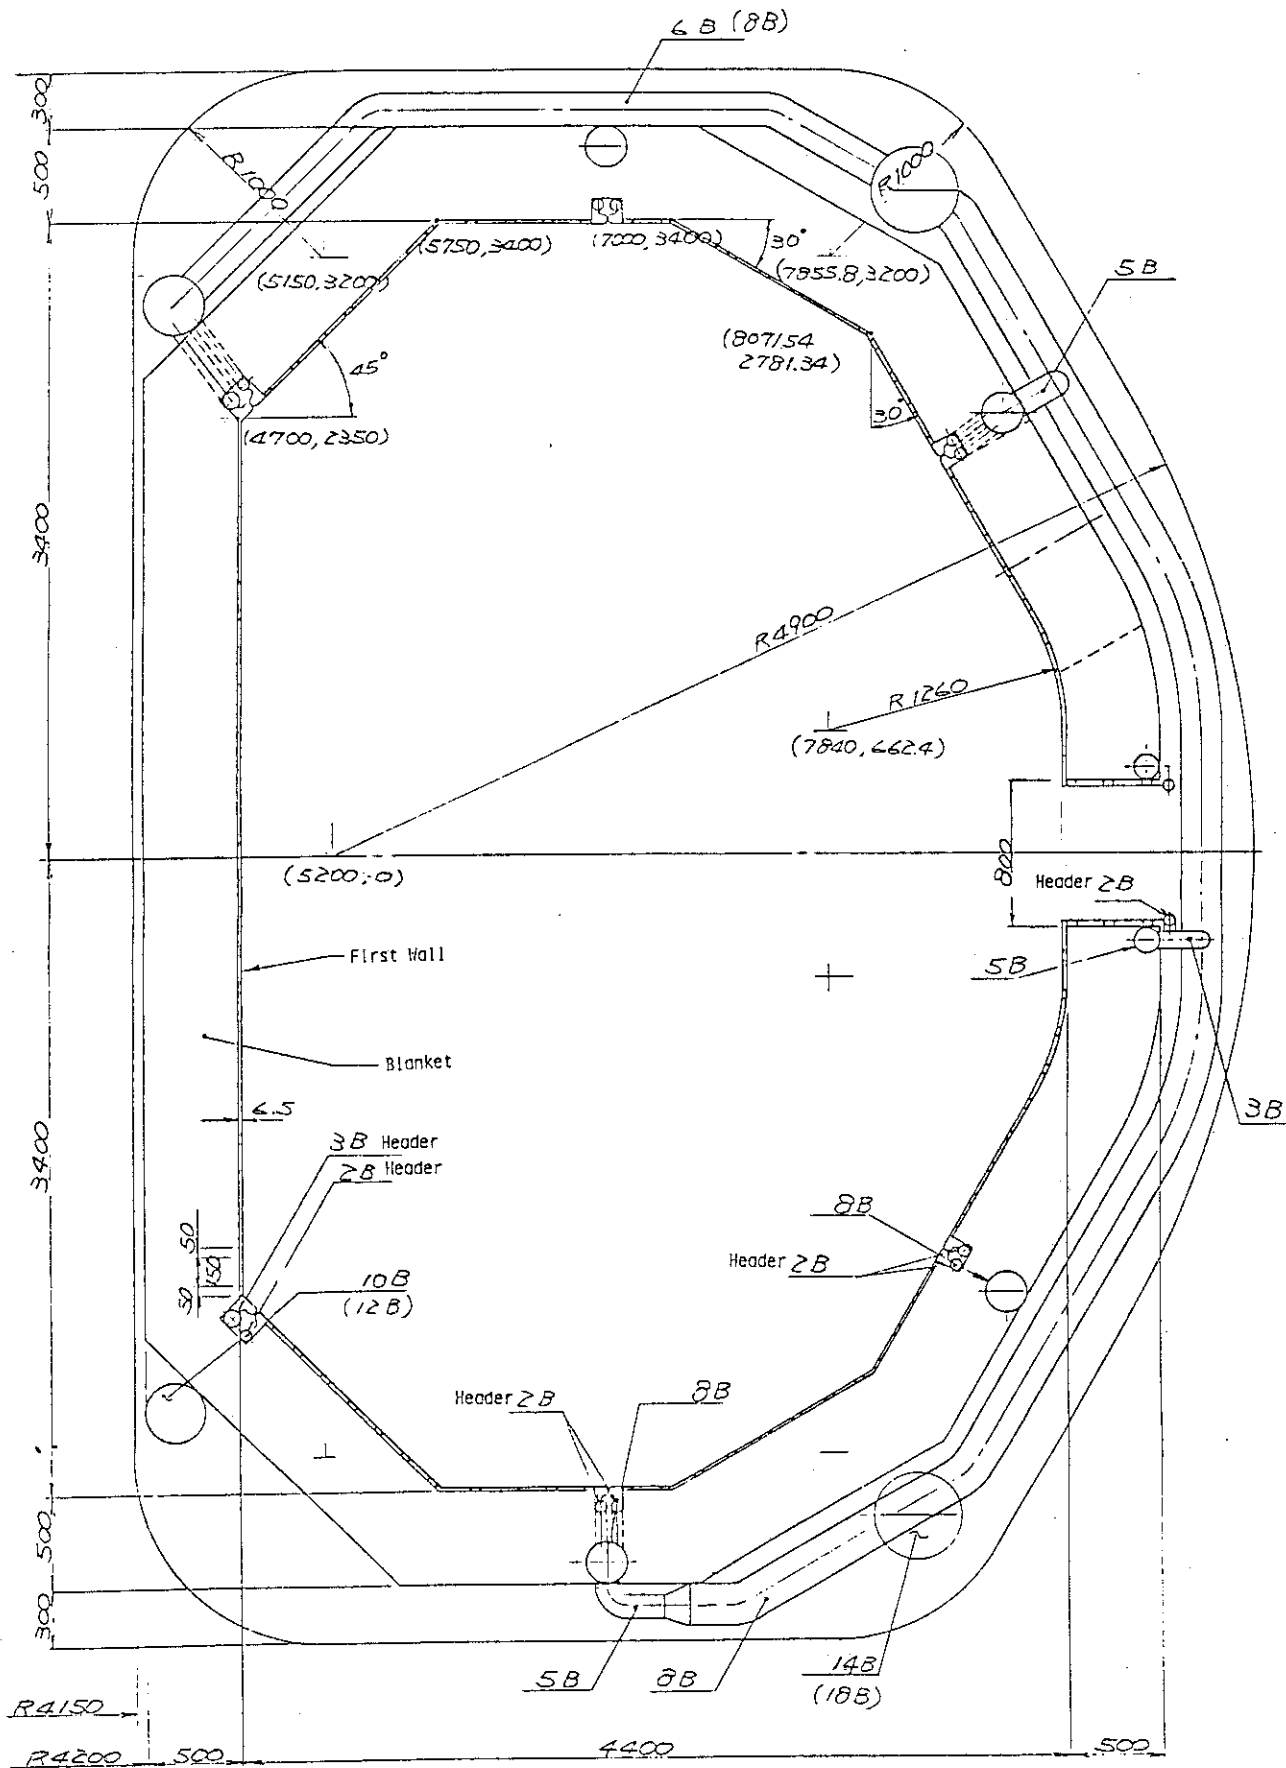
SPTR Power Plant (Elevation View of First Wall and Blanket (1))
